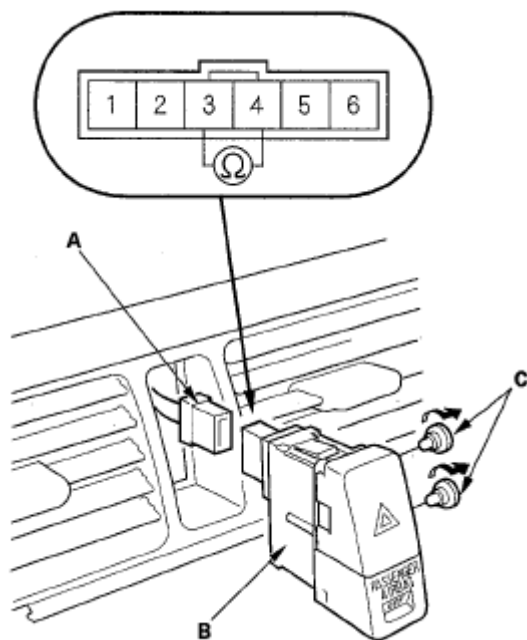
Checking For Continuity Between No. 3 And No. 4 Terminals Of Indicator Connector
